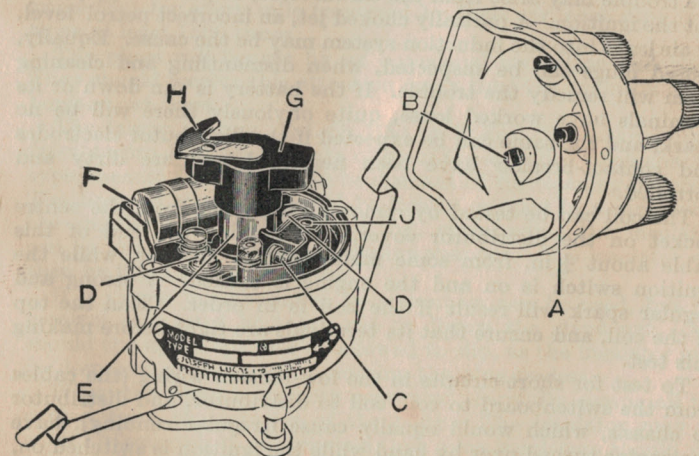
PART SECTIONAL VIEW OF THE DISTRIBUTOR
